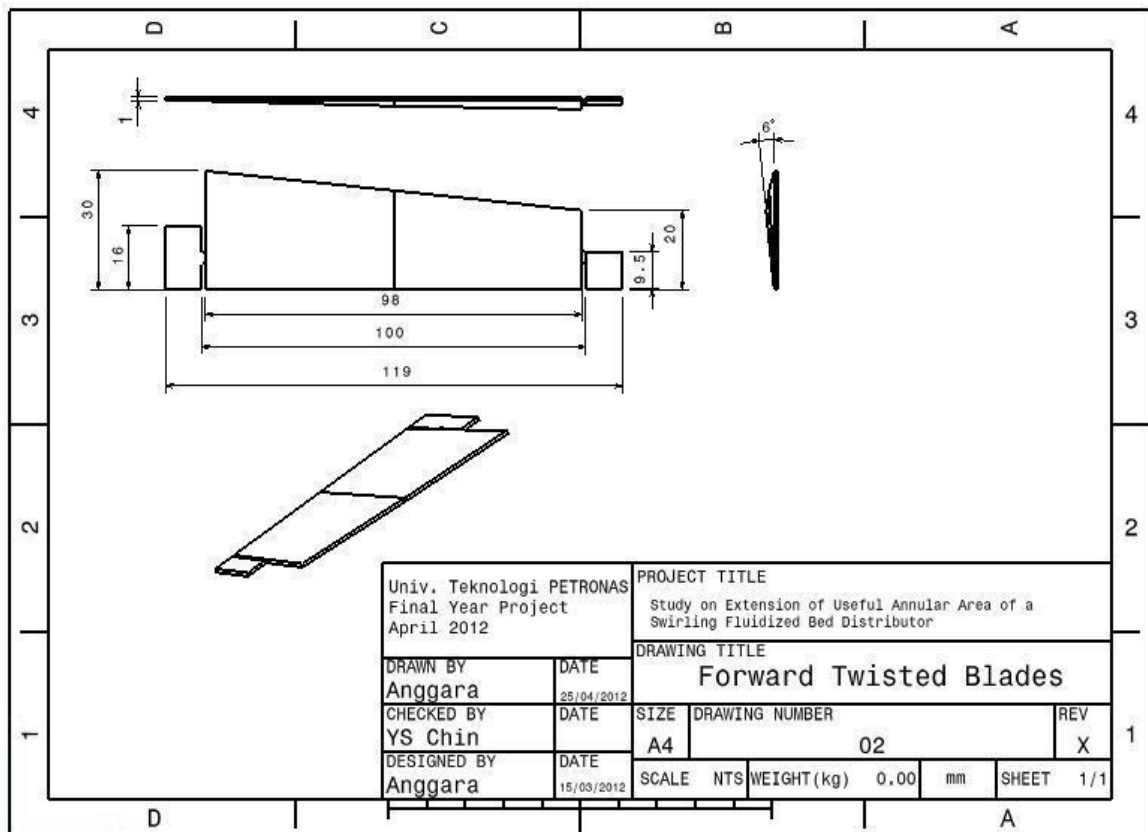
Detailed Drawing of Forward Twisted Blades
